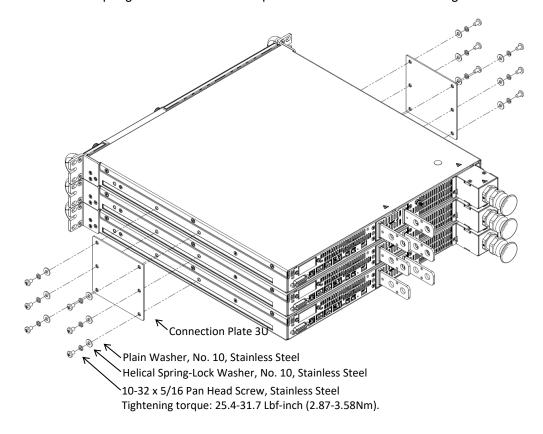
Three 20V-40V Units Connection Plates 3U Assembly
